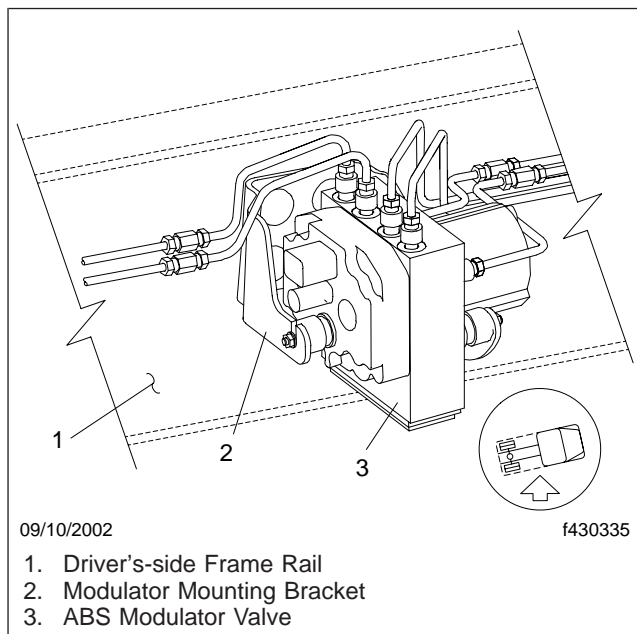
, ABS Modulator Assembly Mounting, "D" Version
